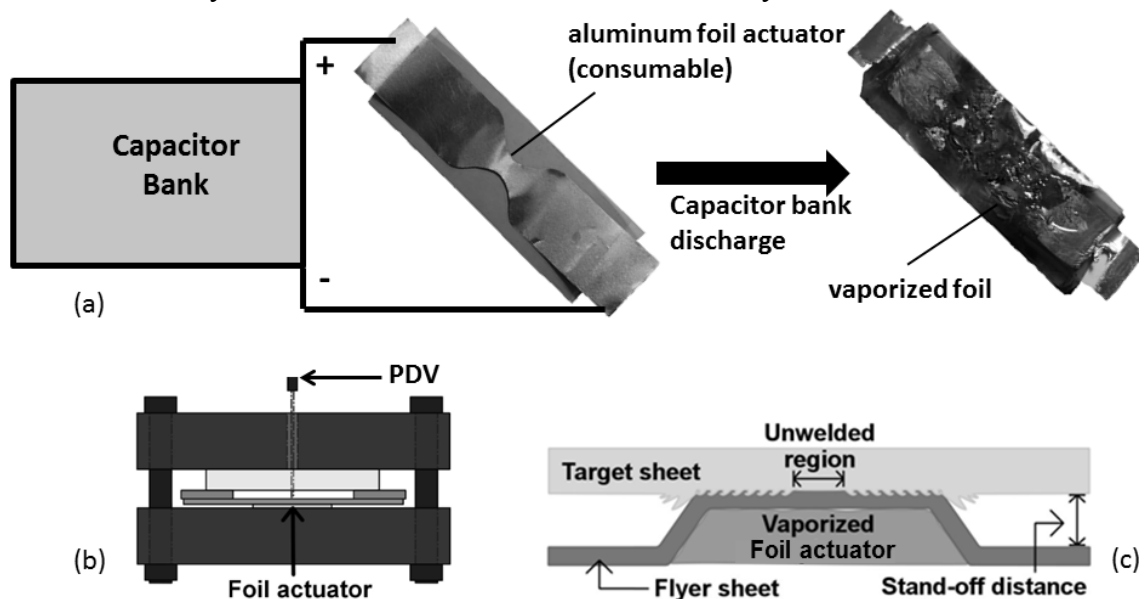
Schematics of the VFAW process: (a) the before and after experiment conditions of the foil actuator, (b) stack-up of a typical VFAW assembly, (c) close-up view of the welding operation
